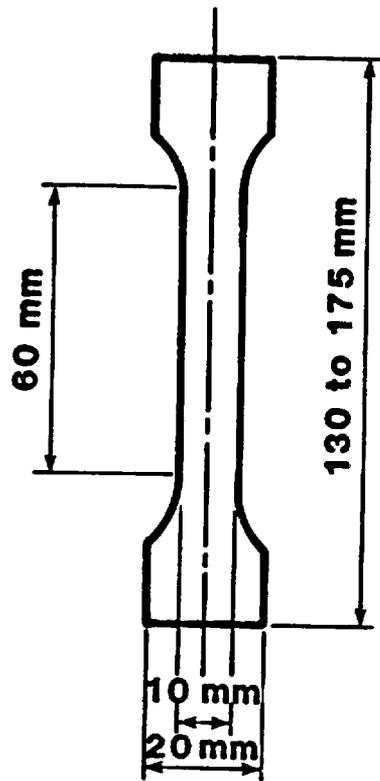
Dimensions for 82 H5 and 82 H6 ISO Dumbbell Samples
